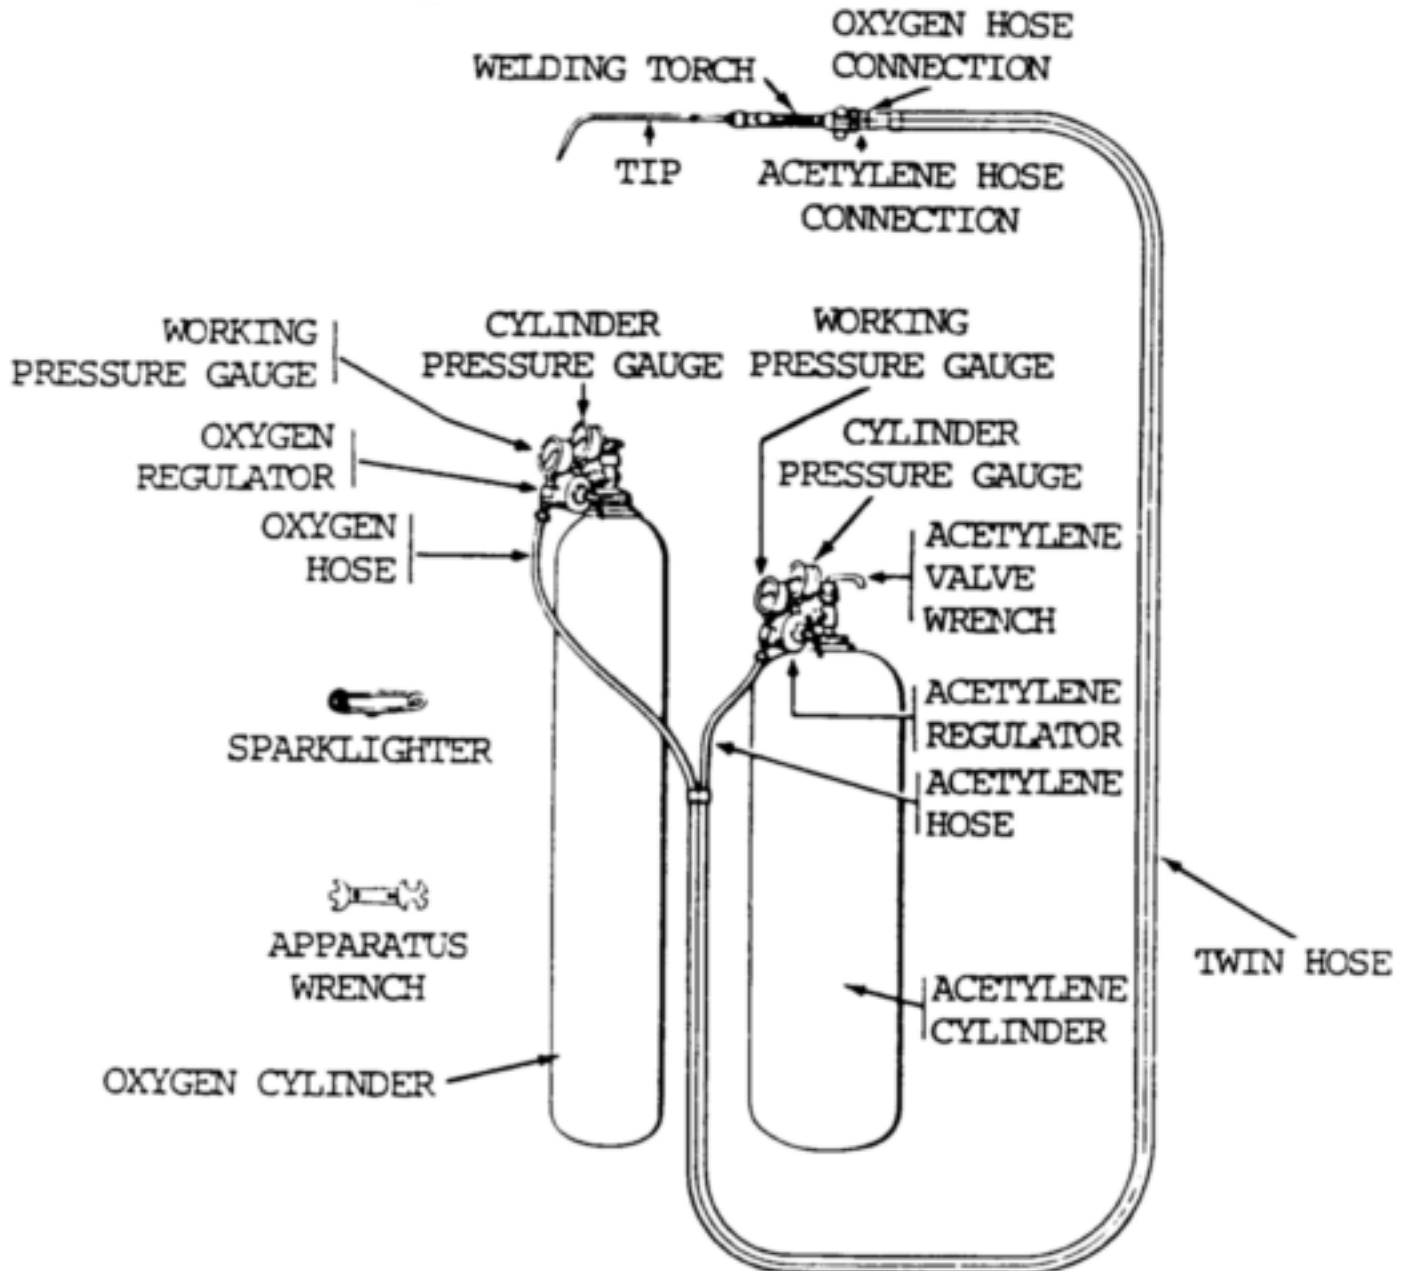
Portable oxyacetylene welding and cutting equipment.
